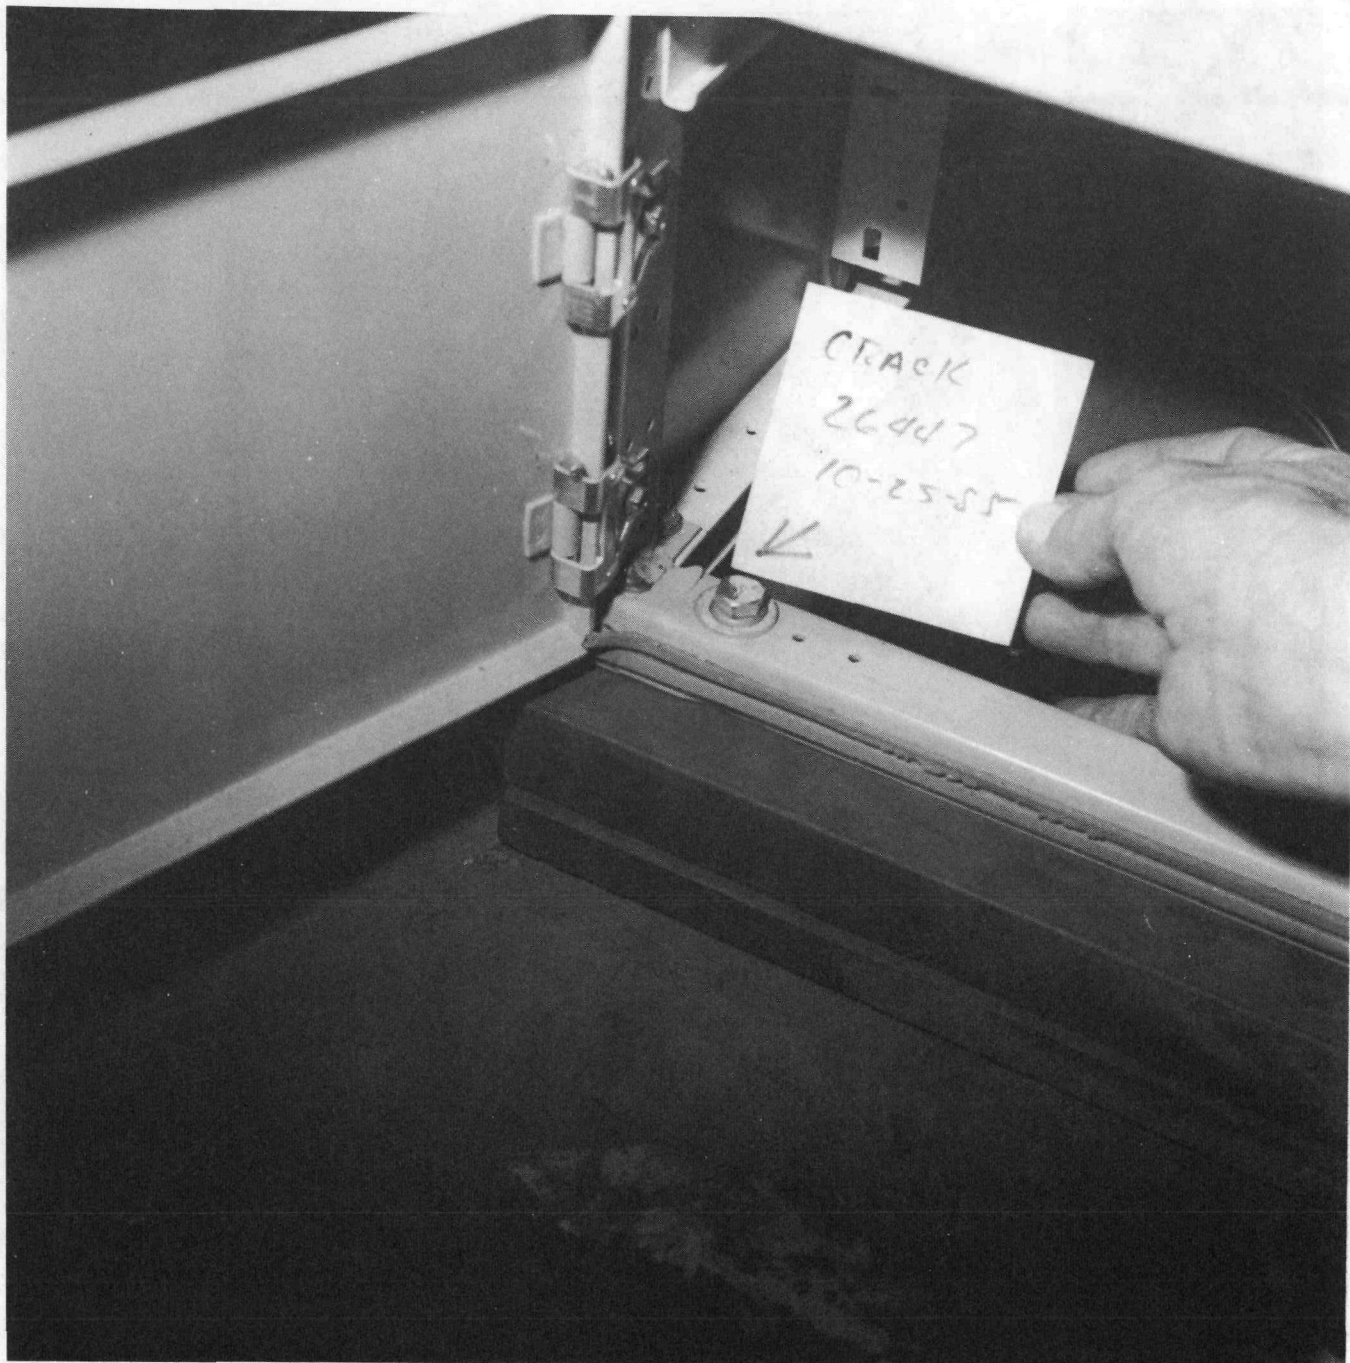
Details of cracked welds following Run 29 (1.6g table ZPA).
